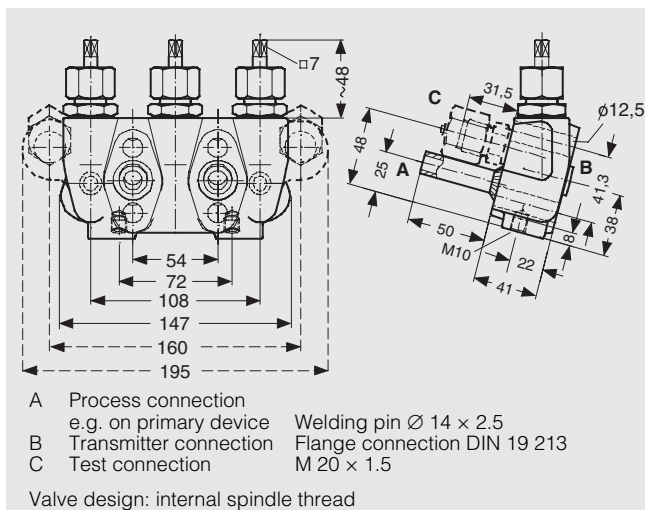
/71 Three-way valve manifold DN 8 with welding pin, dimensions
